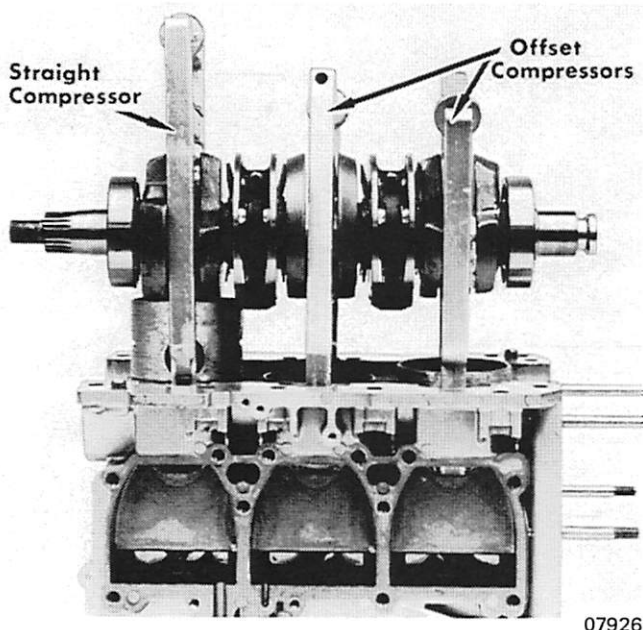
Placing Crankshaft Assembly in Cylinder Block with Compressors
